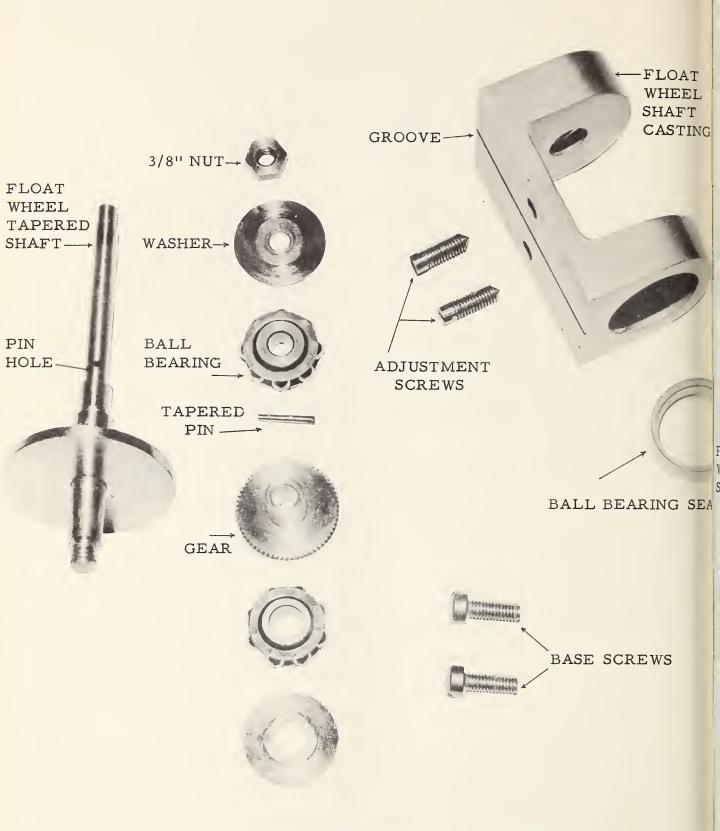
Type A. Float wheel shaft, detail of parts.
